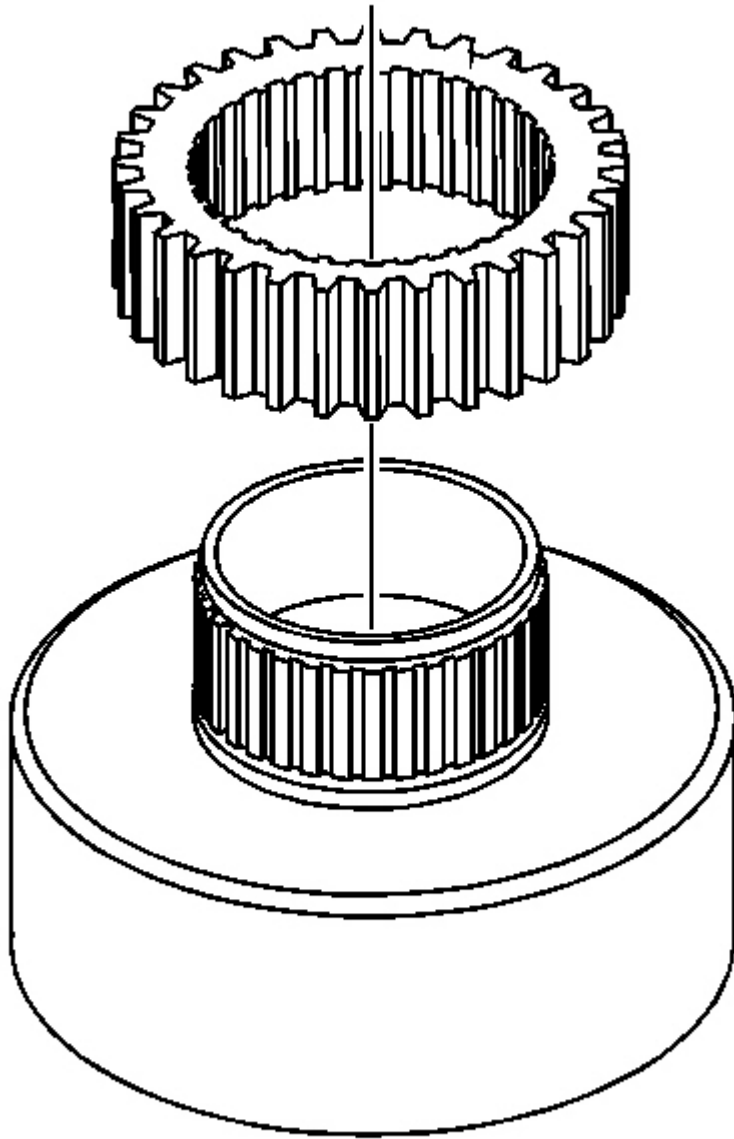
Identifying Clutch Plates, Housing & Clutch Hub
